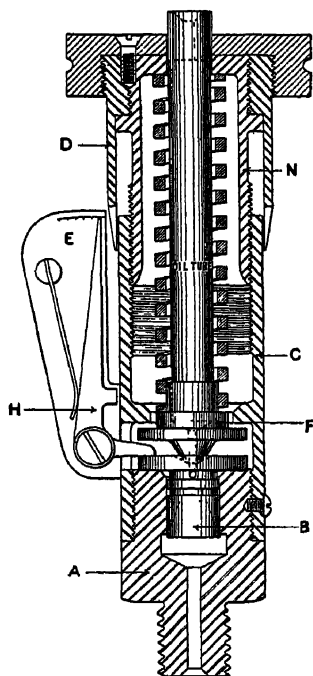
SECTIONAL VIEW OF OKILL PRESSURE INDICATOR
